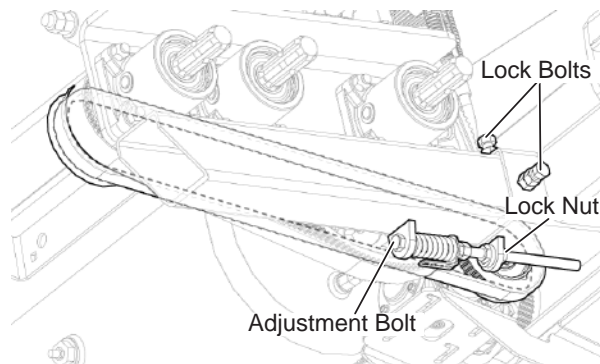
Left Draper Drive Belt 1 Tension Adjustment
